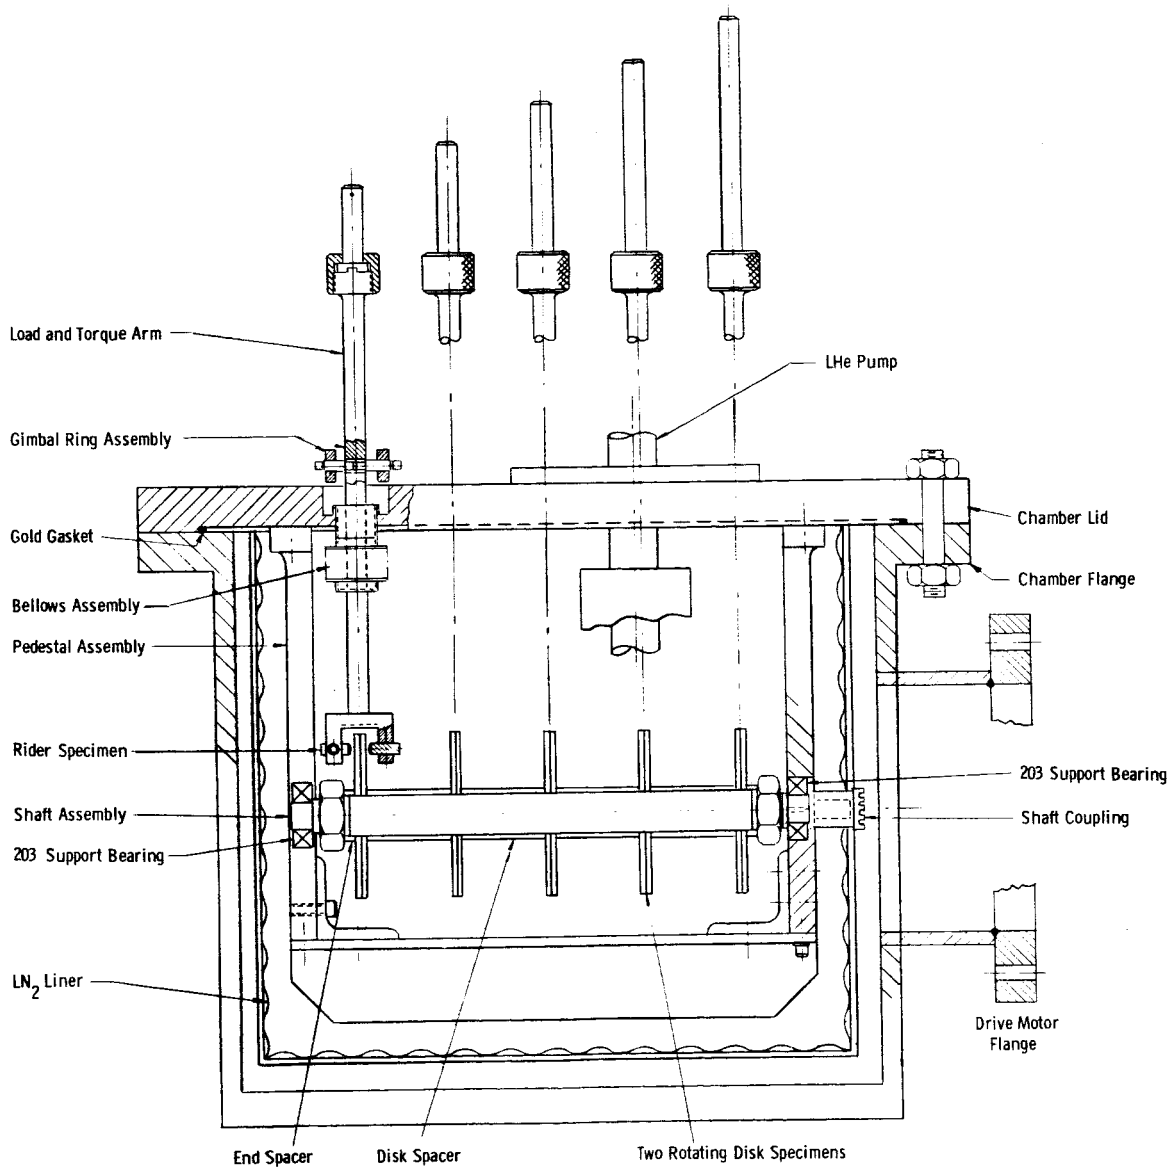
Vacuum Chamber Detail for Sliding Tests
